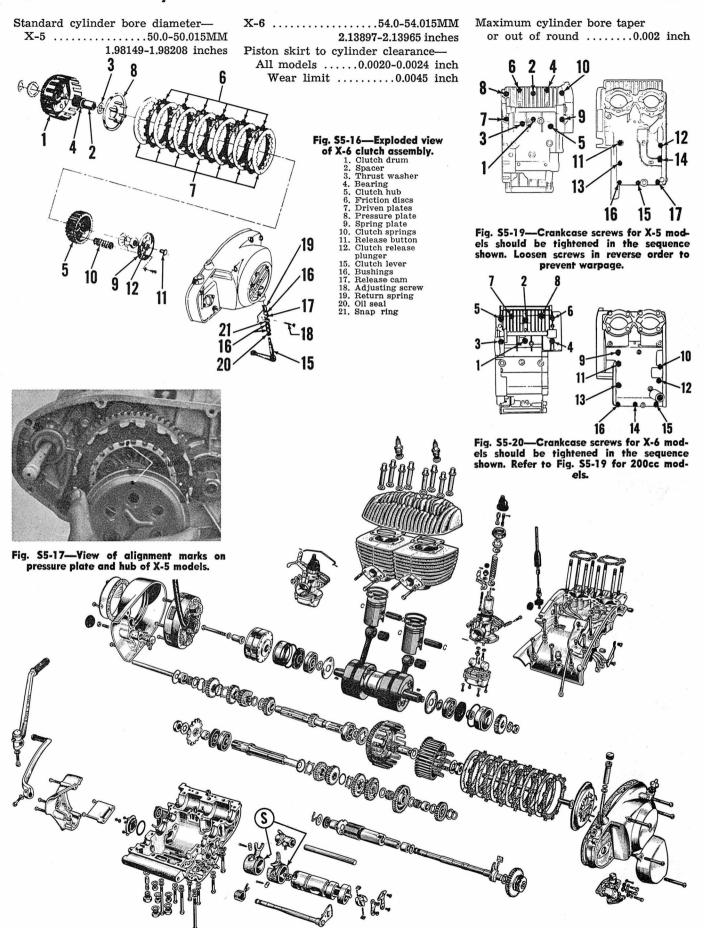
Exploded view of the X-5 engine and transmission assembly. Flanges (S) on shift forks should be toward right side as shown.
